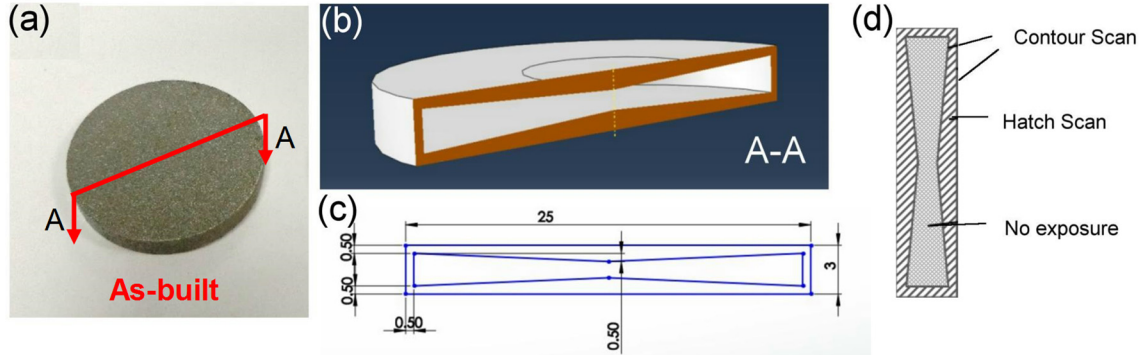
(a) An LPBF fabricated sample; (b) a geometric model of LPBF sample; (c) Dimensions of the 2Cone-0.5 powder-enclosed samples (unit: mm); (d) Build direction and scan conditions in LPBF.
